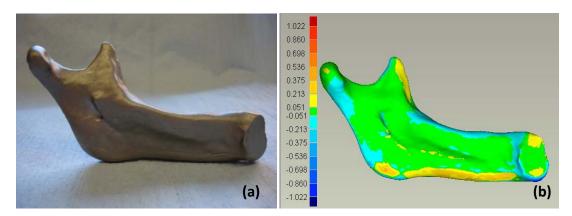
Implant to repair the mandibular defect. a) Model produced in Ti-6Al-4V through selective laser sintering. b) Differences (in millimeters) between the CAD model and the produced model.
